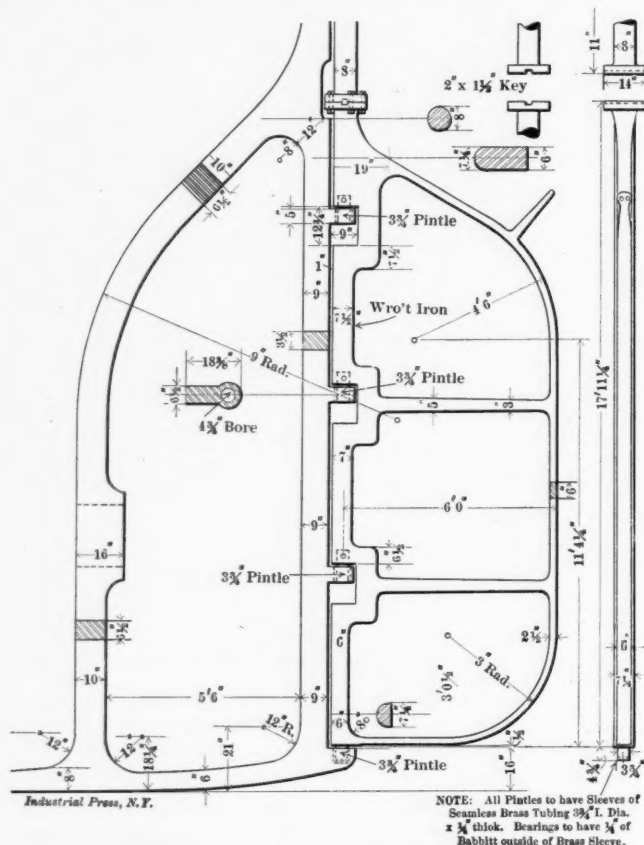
Stern Post and Rudder for which Portable Boring Machine was used.
